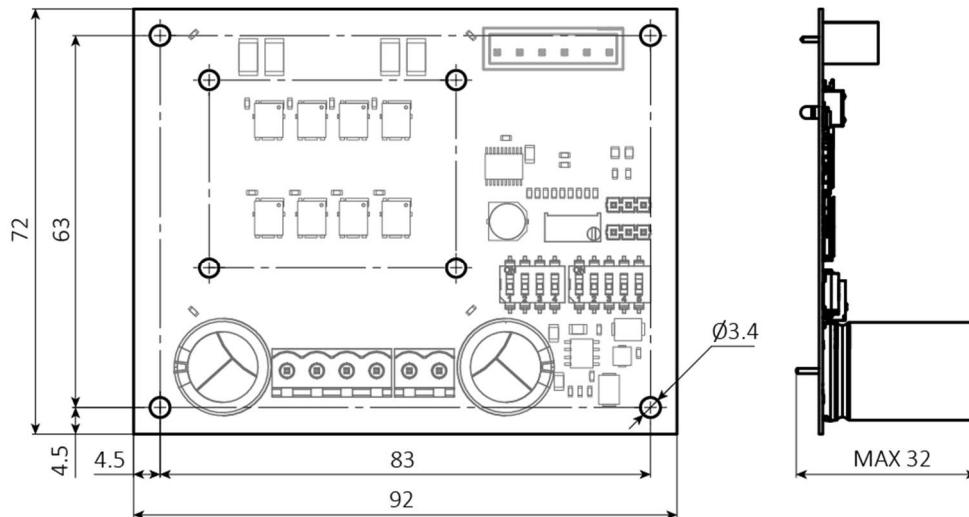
Dimensions of stepper motor driver SMD-4.2 open frame version
